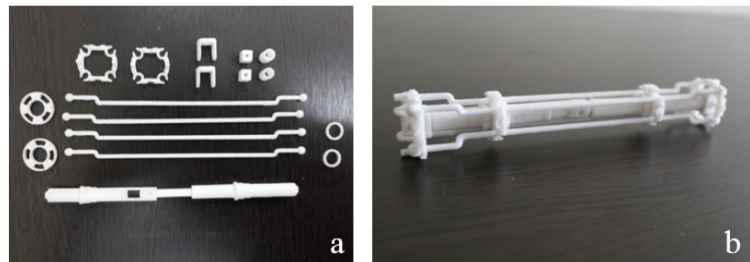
3D Printed mechanism parts (a) and assembled mechanism (b).
